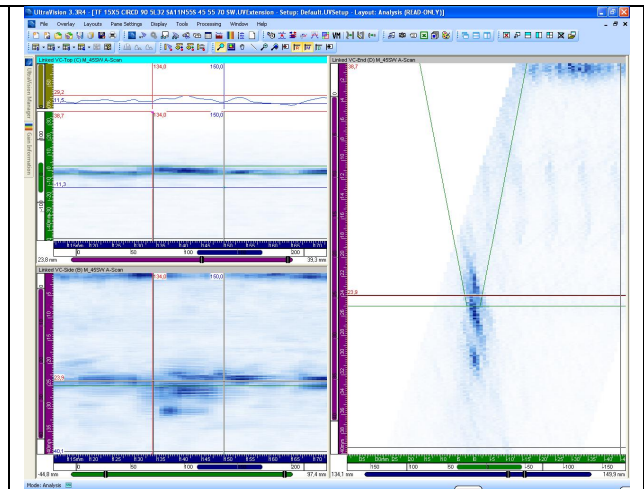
General views of weld TF scanned with technique PA-3.
